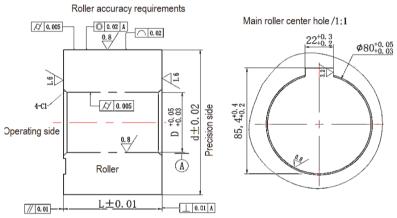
shaft diameter of 80mm roller processing accuracy standards
